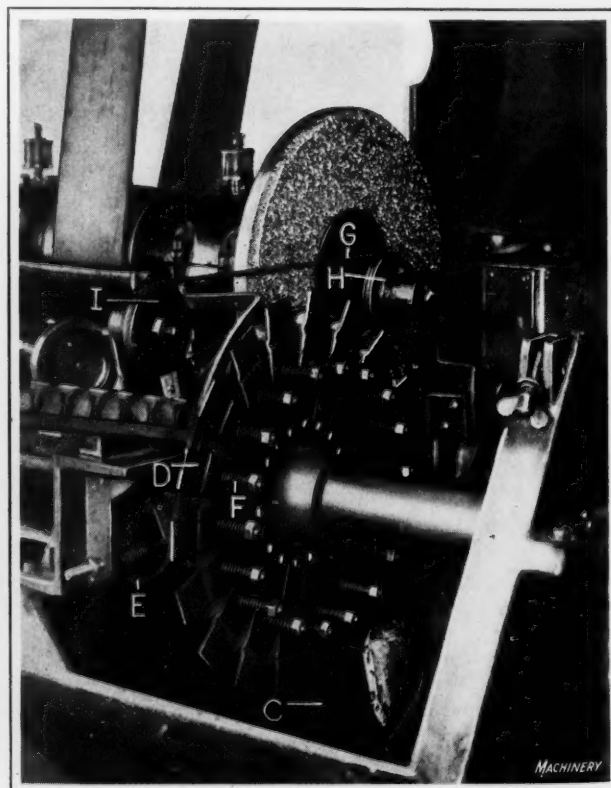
Work-holding and Feeding Mechanism of Machine in Fig. 4
